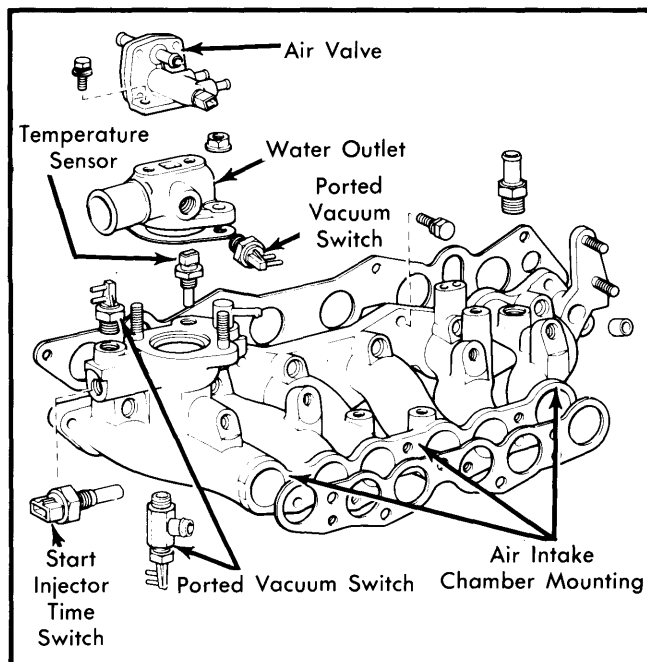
Toyota 5M-E Intake Manifold Assembly
